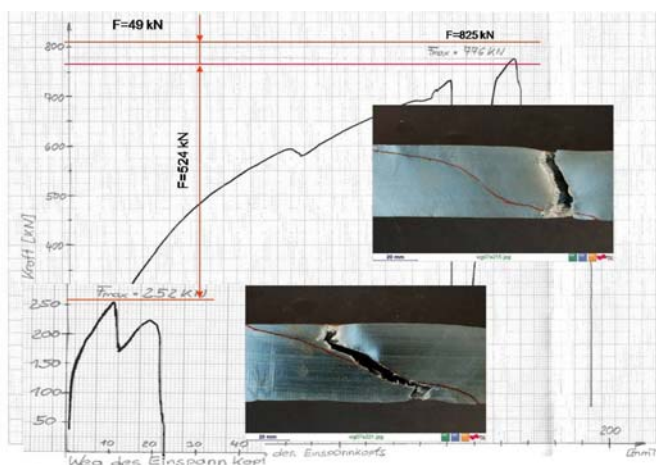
Water gas weld, load bearing capacity [5].
